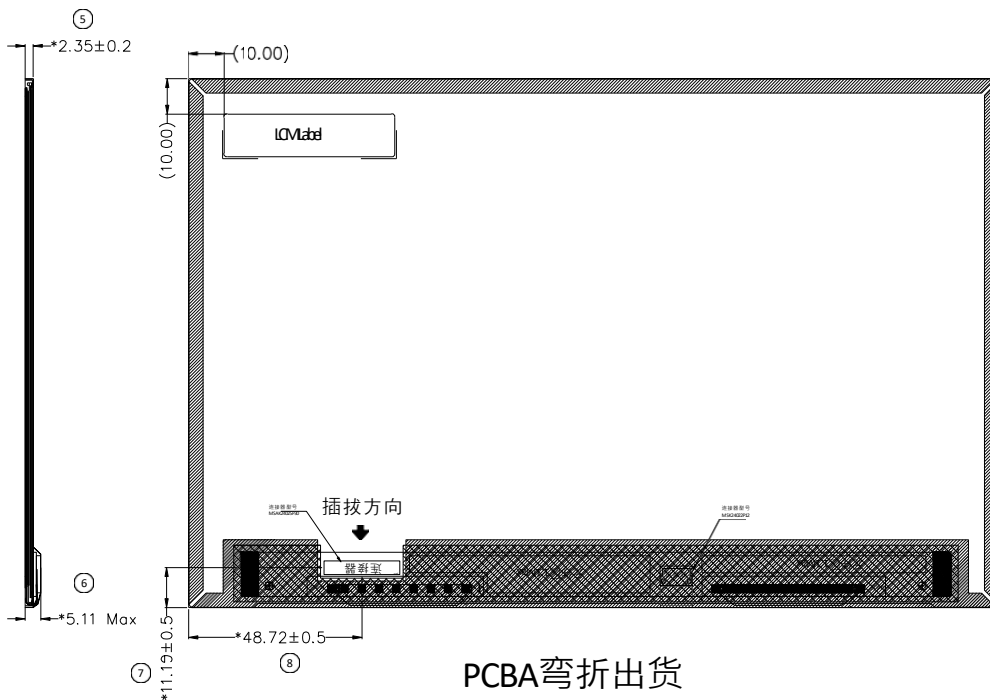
TFT-LCD Module Outline Dimensions (Rear view)
